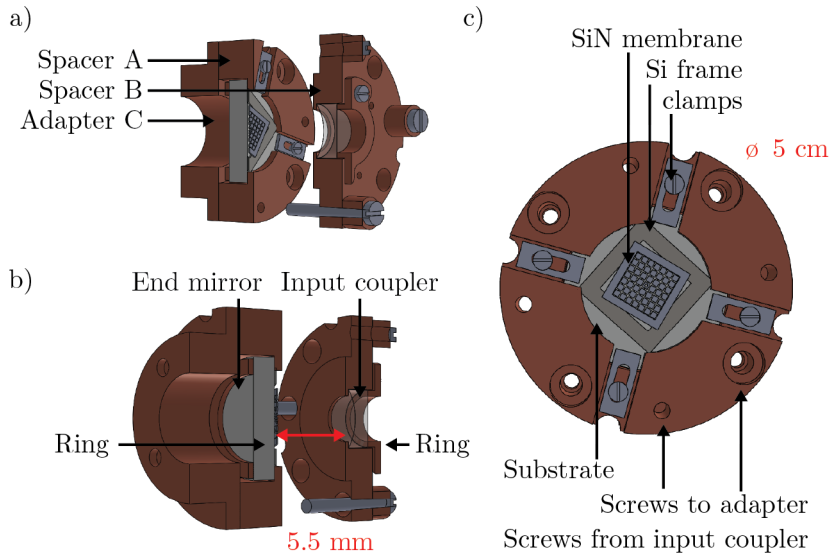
CAD drawings of the optomechanical cavity. a) and b) show a sectional view from the front and back of the cavity. The length of the cavity (mirror to mirror) is 5.5 mm and the diameter of the full spacer is 5 cm. The mirrors are clamped uniformly onto the spacers by means of a ring. c) The Si chip to which the SiN phononic bandgap membrane is glued, is fixed onto the flat end-mirror by clamps. Four long screws running through a hollow cylinder and a spring are used to fix the spacers to each other during the alignment procedure. The springs are short-circuited by the cylinders when the spacers are finally bolted together.
